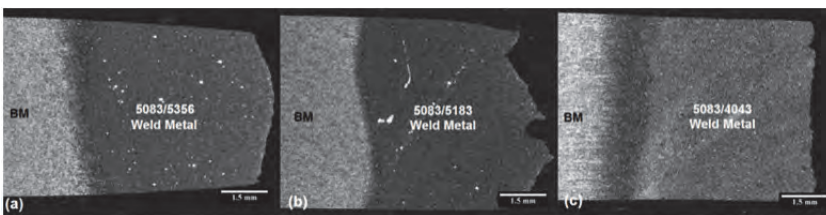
Tensile fractures of weld joint in 5083 alloy welded with (a) ER5356; (b) ER5183; and (c) 4043 filler wire.
